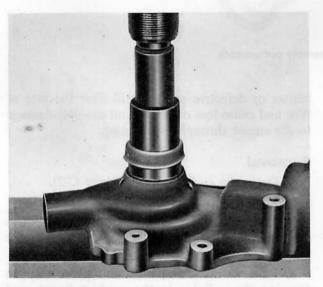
Pressing on a bearing retainer, using a sleeve of similar outside diameter
